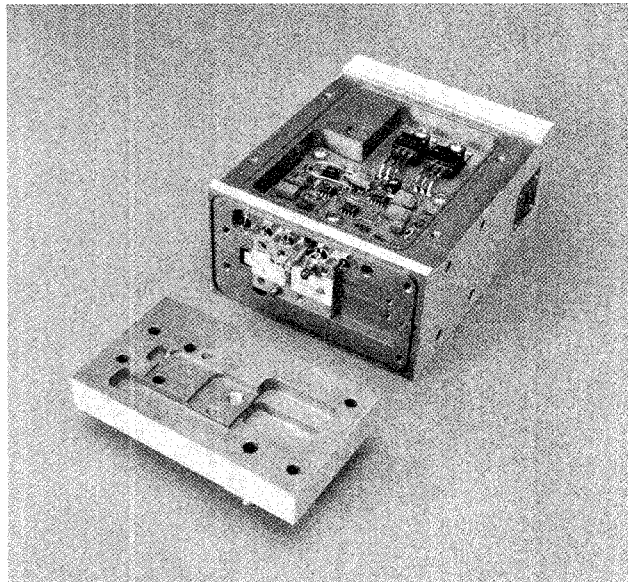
Downconverter housing showing MMIC assembly and bias circuits
